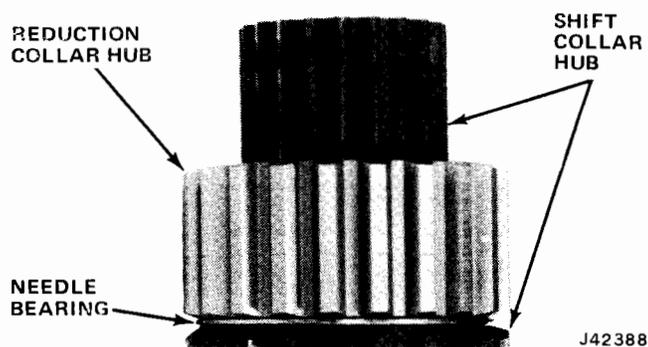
Needle Bearing and Reduction Collar Hub Assembled with Shift Collar Hub
